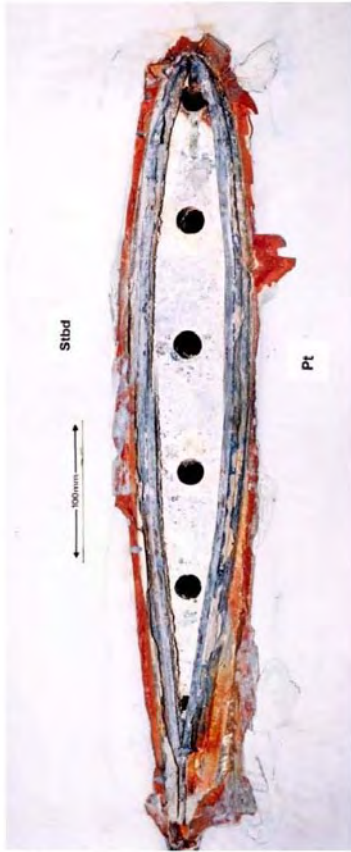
Keel blade fracture site, which was coincident with the toes of the fillet welds joining the keel blade to the face of the fabricated upper tapered box.
